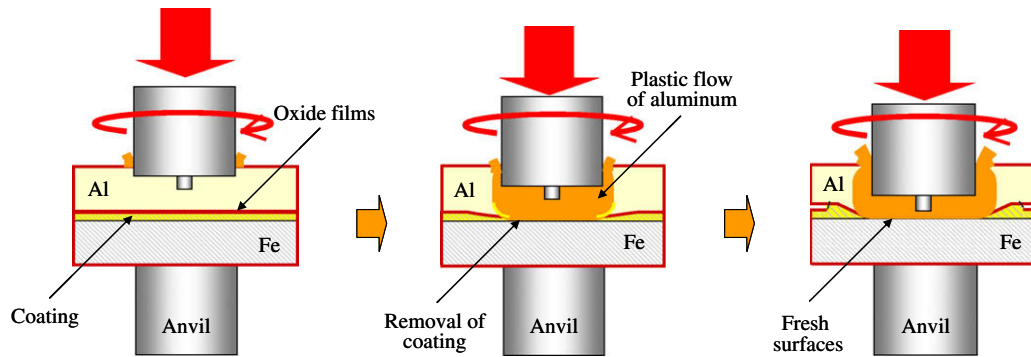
A schematic illustration of the spot friction welding process used to join an aluminum sheet to a coated steel sheet.
